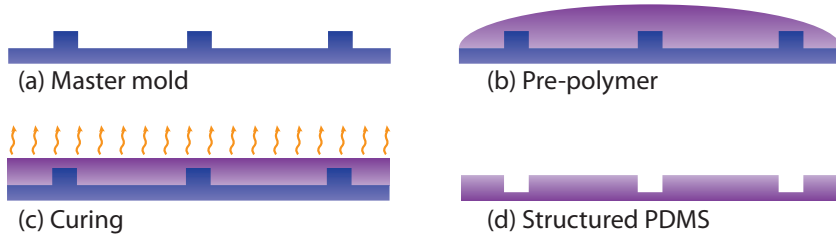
Casting of PDMS structures. (a) Negative master mold fabricated by micromilling or cleanroom fabrication methods. (b) Pre-polymer is poured over the mold and (c) cured. (d) Final positive structure.
